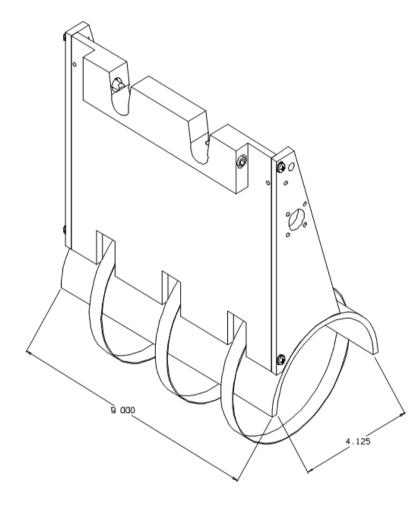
Weldment, Hughes 300, skid mount, low profile omni deployment
